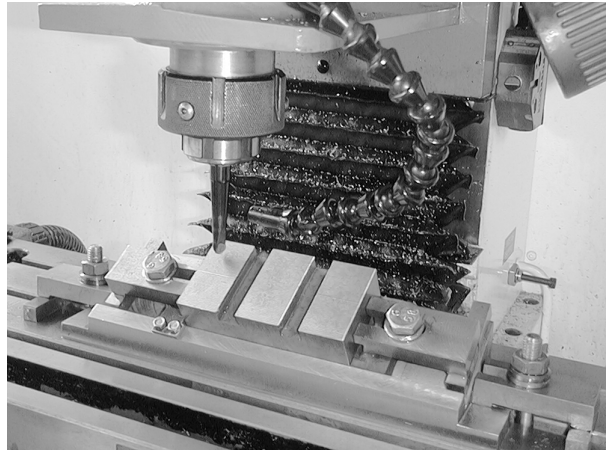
View of milling of a specimen mounted in a machining holder at an angle of  $60^\circ$  using a CNC TRIAC 200 milling machine
